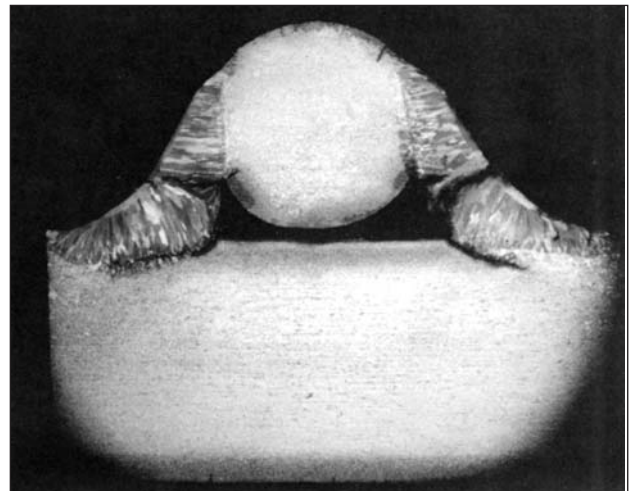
Thermal-fatigue cracking emanating from incomplete welds.
